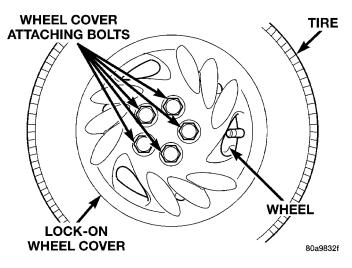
Wheel Nut And Wheel Cover Retaining Nut
